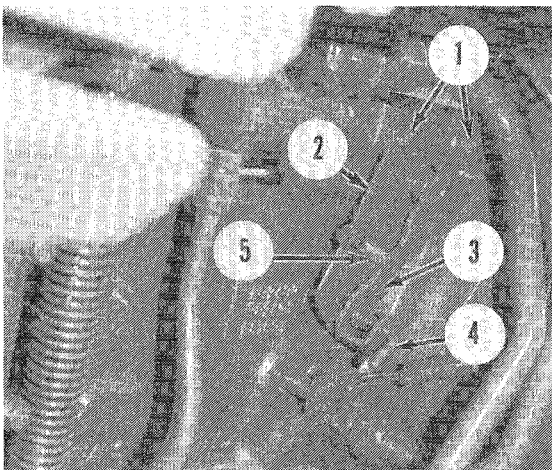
When reinstalling tow disconnect assembly, align stop plate (2) and shift lever (3) as outlined in test before tightening mounting screws (1).
